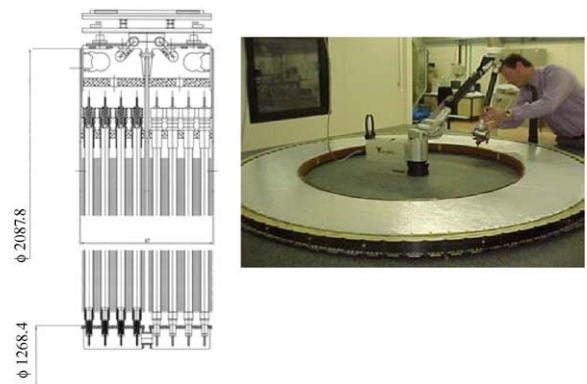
Drawing of the detailed layout of a type-A 8-plane wheel (left) and photograph of one of the wheels assembled in Russia and under tests at CERN.
